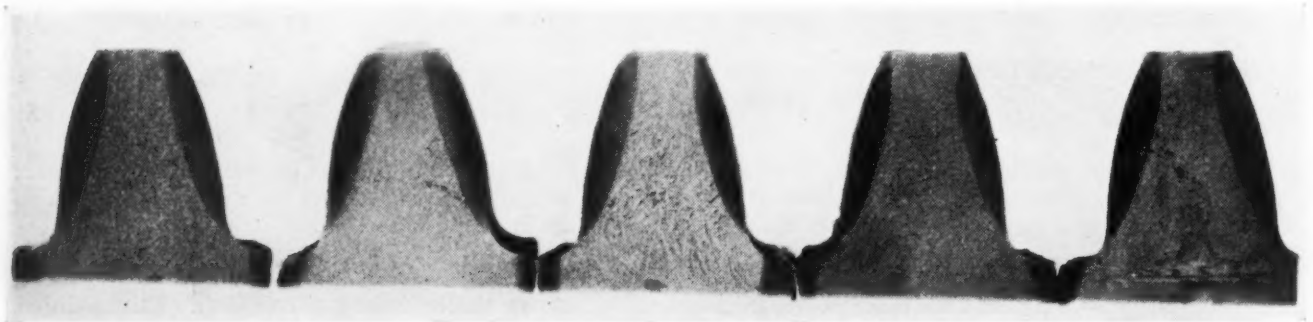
SHOWING THE UNIFORMITY OF THE CASE IN FIVE POLISHED AND ETCHED CROSS SECTIONS OF THE SAME GEAR TOOTH
